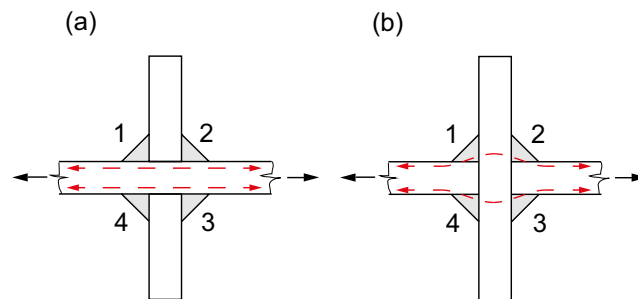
Schematic presentation of load transfer through the fillet welds of non-load-carrying (a) and load-carrying (cruciform joint) fillet-welded joints (b) with sequences of welding, adopted from Braun et al. (2020f)
